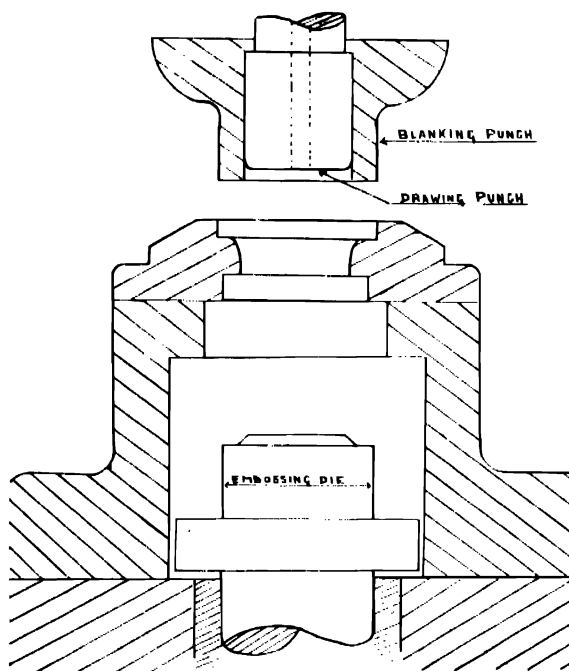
Example of triple-action die. Blanking—drawing—embossing.
